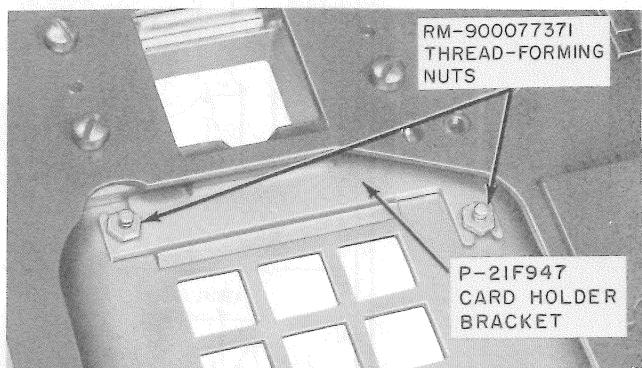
Card Holder Bracket Installed (TOUCH-TONE Set)
